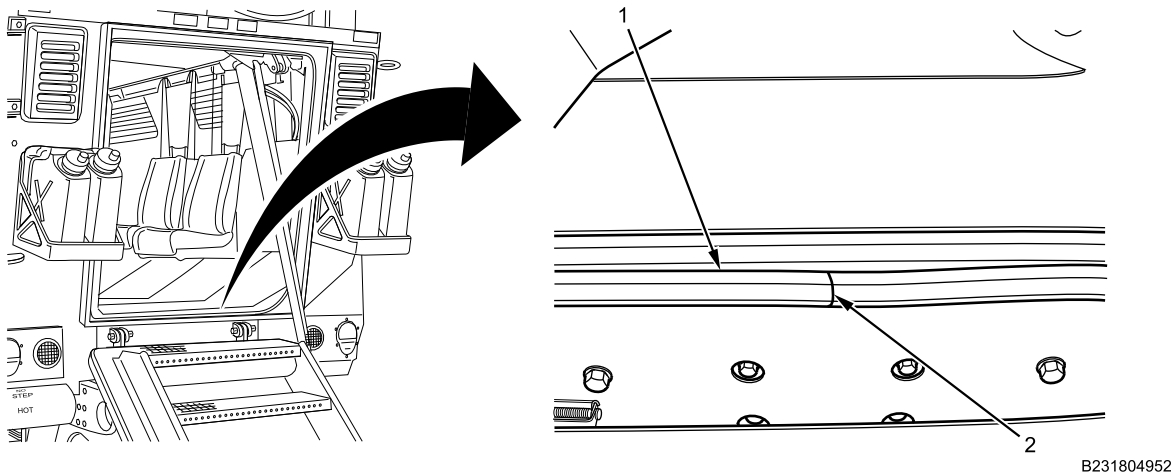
Rear Door/Ramp Seal Seam Adhesive Cut.
